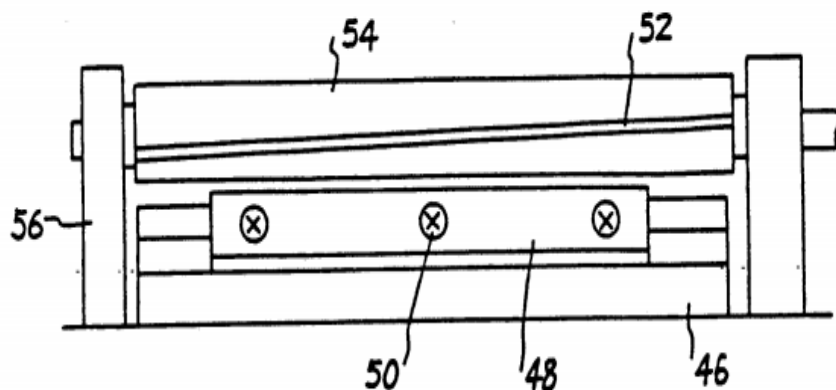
Patent No. 5,001,952 Rotary cutter blade
